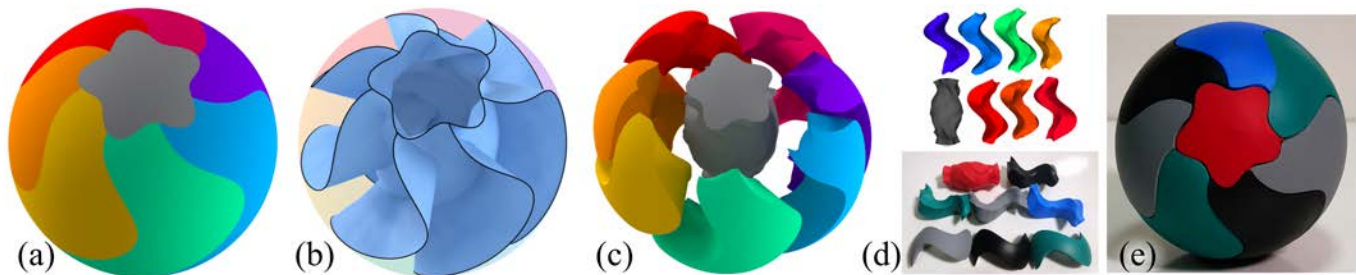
Surface2Volume (left to right): (a) Input multi-color surface; (b) inner interfaces generated by Surface2Volume; (c) assemblable parts conforming to the surface-segmentation; (d) virtual (top) and fabricated (bottom) single-color parts; and (e) assembled target object.
